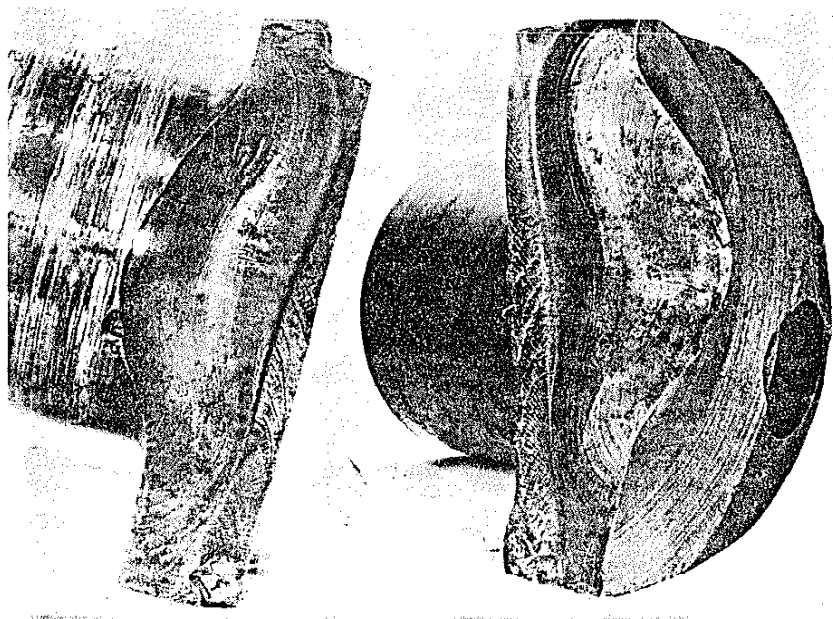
Bending Fatigue Failure of Diesel Engine Crankshaft Resulting from Service Induced Damage.
